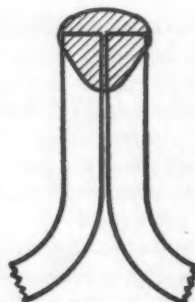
Cross-sectional view of the automatically welded joint used in the construction of the bomb box.
